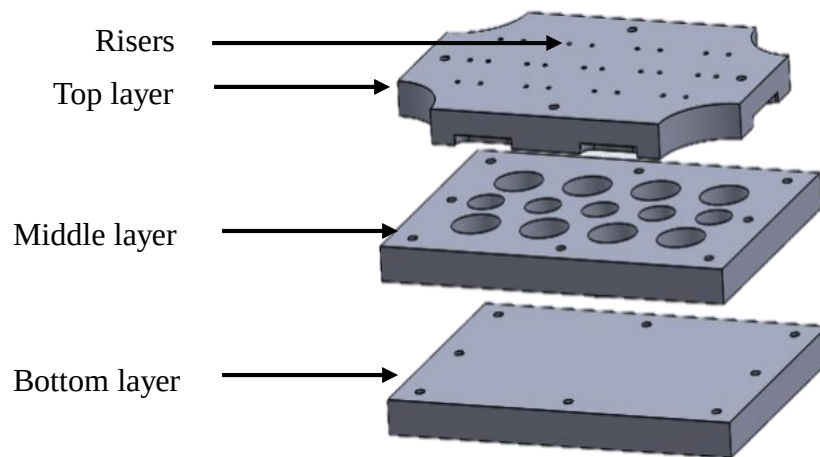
Chemical mixing: Exploded view of the mould design.
